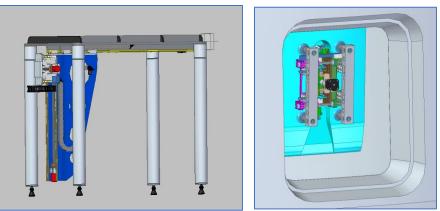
Figure of measuring assembly for the case of the groove's measurement with the window of the shielding cylinder
